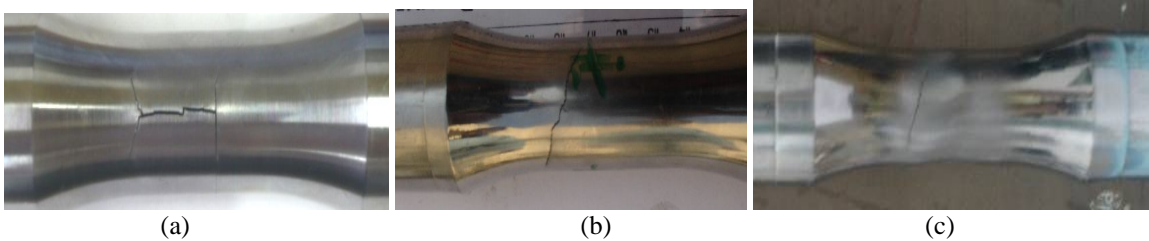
(a) The axial crack appearing in pure torsion test, (b) inclined crack orientation in axial-torsion with 0° phase shift and (c) inclined crack in axial-torsion test with 90° phase shift angle
